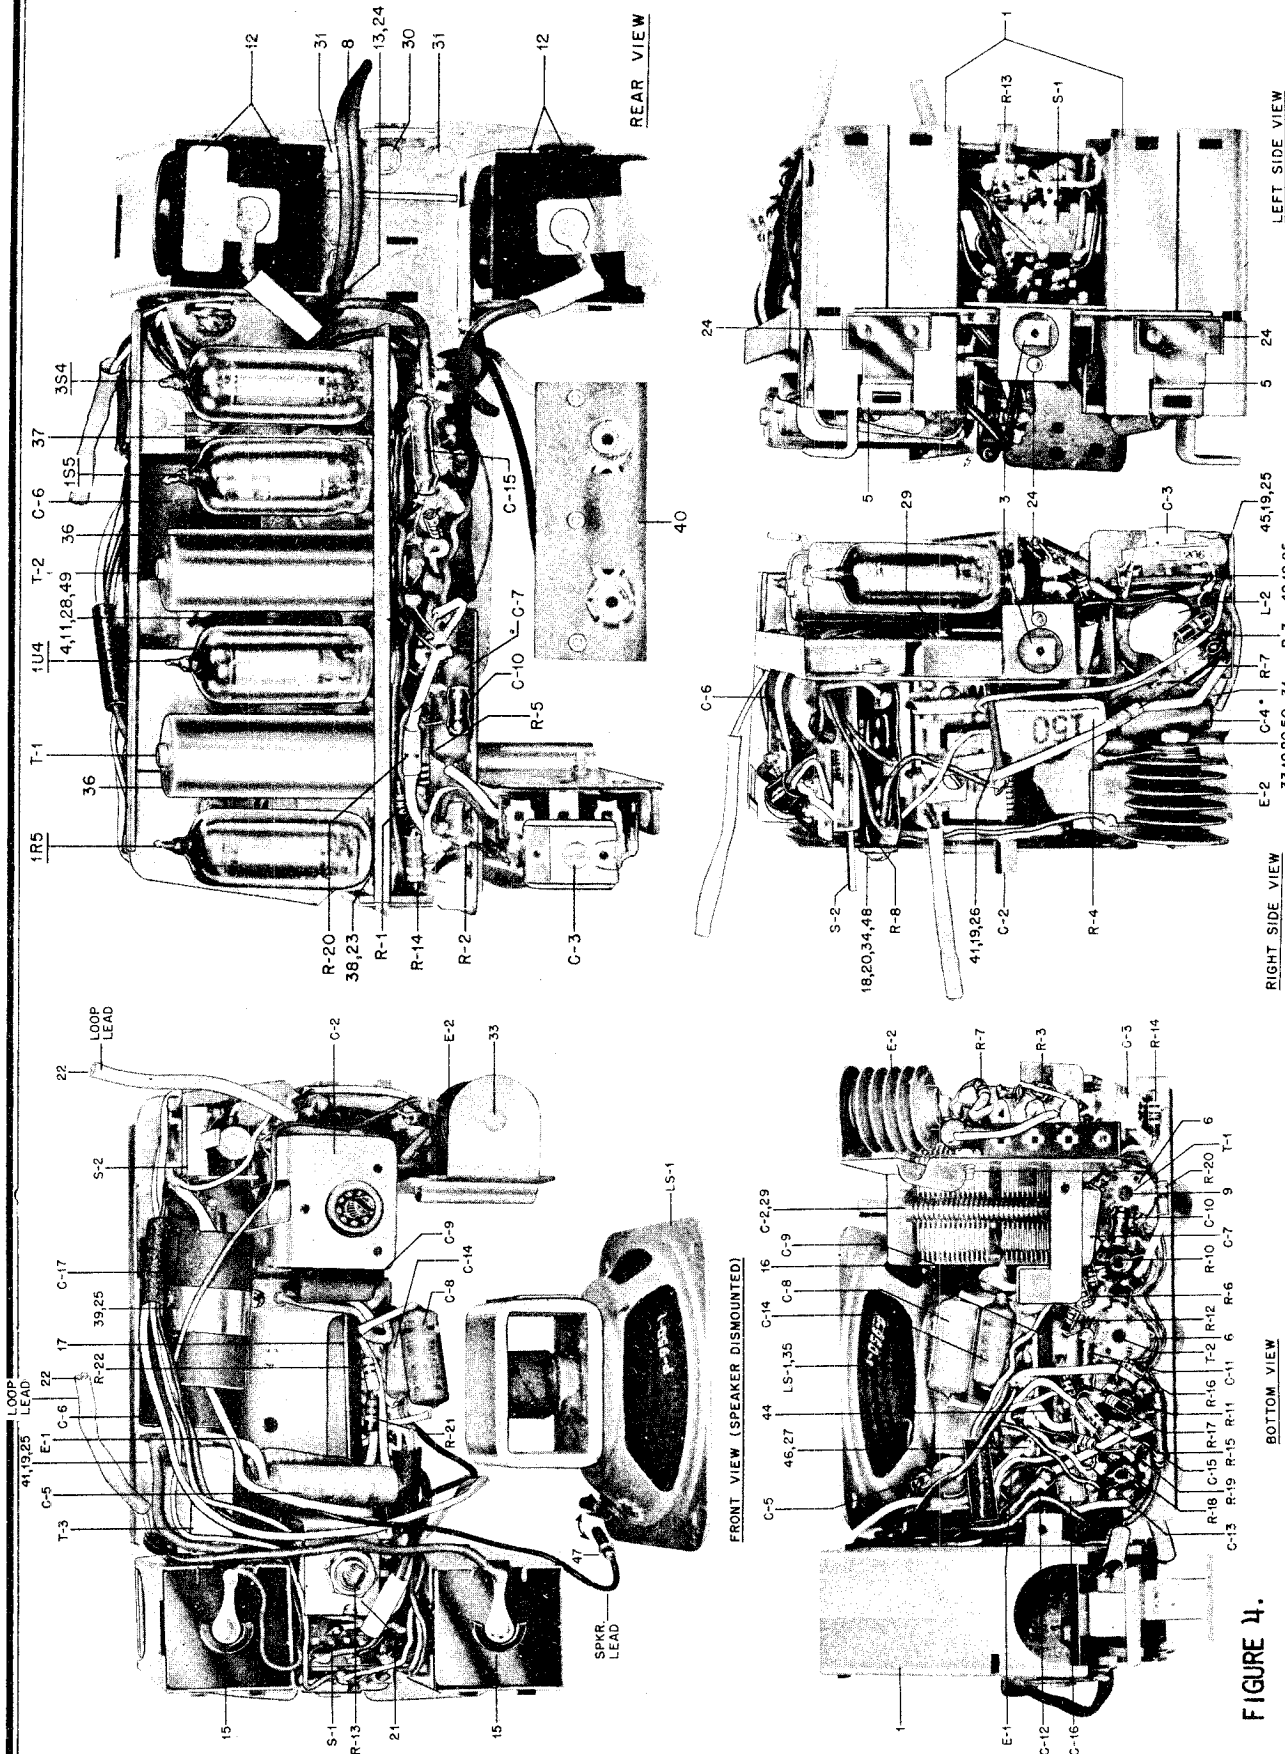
CHASSIS HS-62 PARTS LOCATIONS - FRONT & BOTTOM VIEWS
